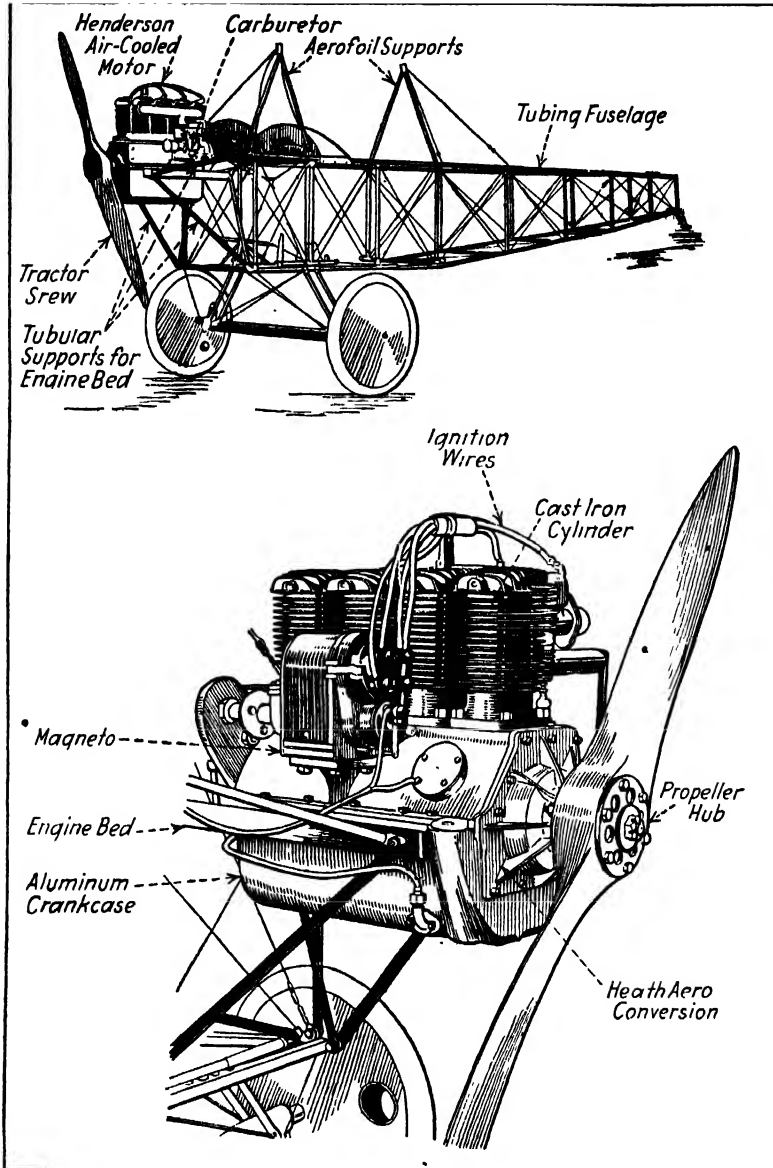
How Henderson Motorcycle Engine with Special Conversion is Installed in Heath Parasol Monoplane. Top View Shows Complete Fuselage and Relation of Engine Supports to Other Parts of the Tubular Structure. Lower View is a Close-Up of the Engine, the Small Size of which can be Understood by Comparing it with the Magneto.
